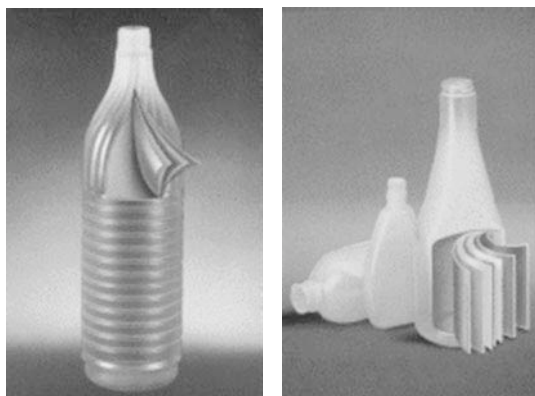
Cross-section of multilayer bottles produced through co-extrusion.^[1054]
